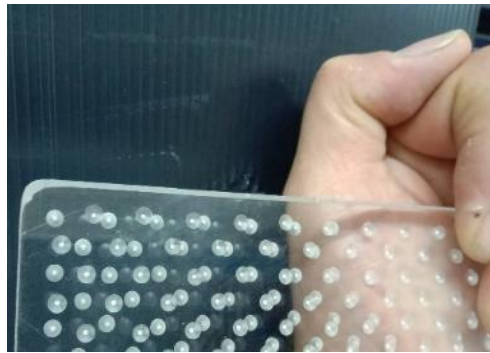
Double layers drilled holes, 3 mm \varnothing .
